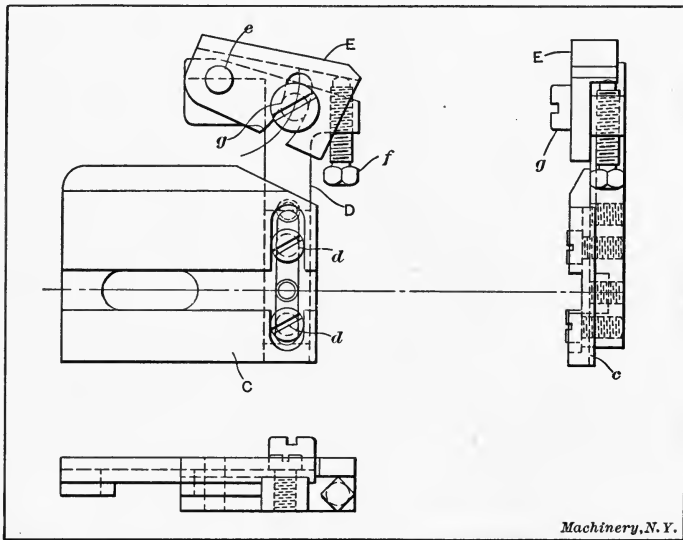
Raising Block used for Operating Swing Tools on Brown & Sharpe Machines
